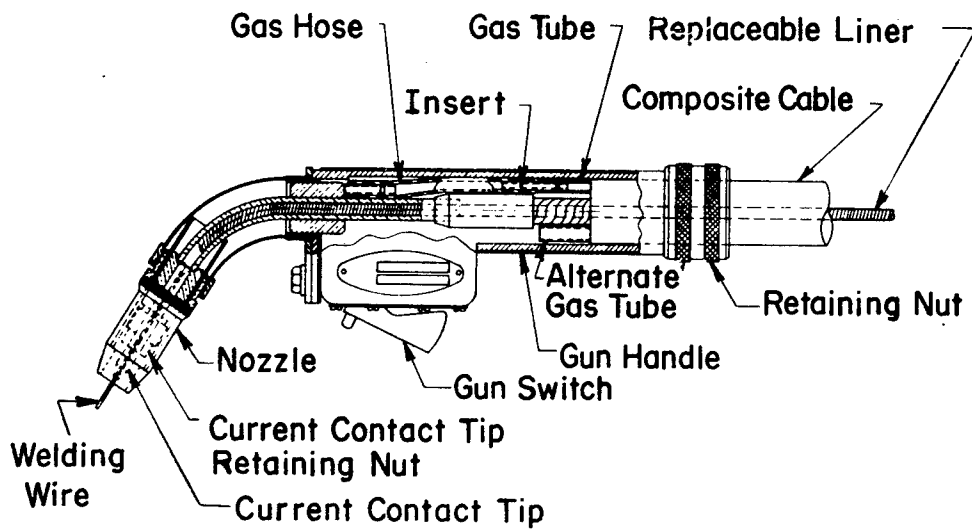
TYPICAL MANUAL WATER-COOLED CURVED-NECK TYPE GAS METAL-ARC WELDING ELECTRODE HOLDERS
